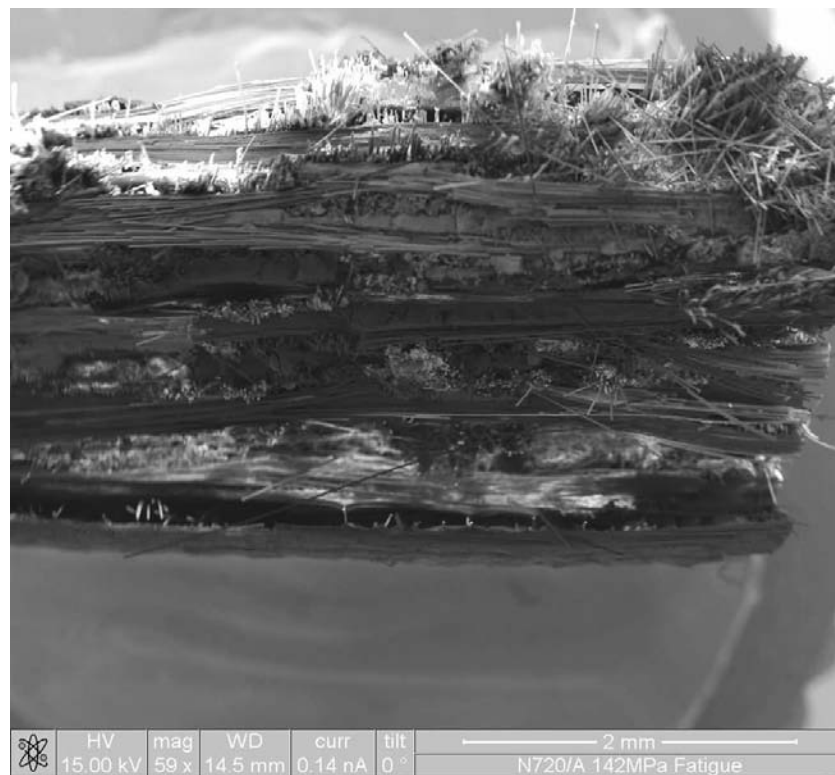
142 MPa Fracture Surface, Overhead Right View, 59x
